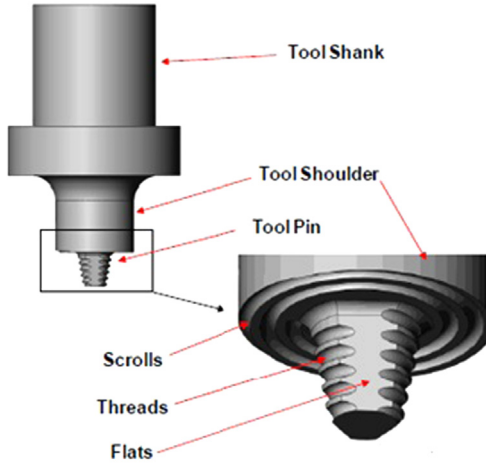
FSW tool. The tool shoulder is butted against the workpiece and the tool is rotated as it advances. This process mechanically stirs the workpiece metals together at elevated temperature, but without melting.
